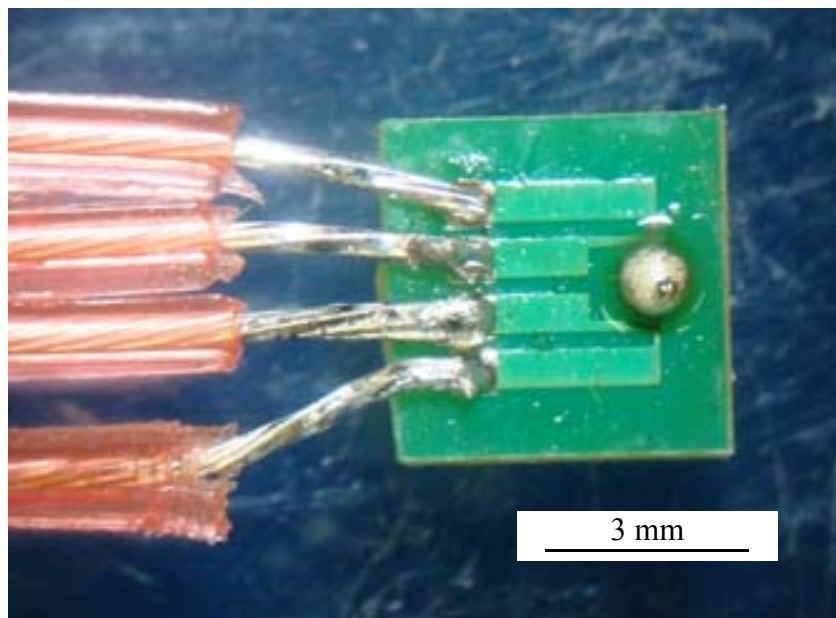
Top view of the sample after PTFE wires are joined to the soldering pads.
